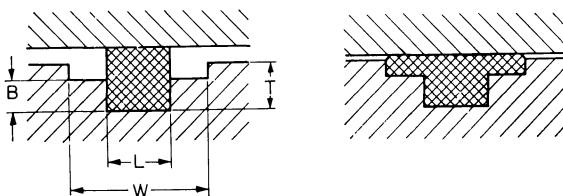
Square cross section gasket sealed in rectangular cross section step groove
